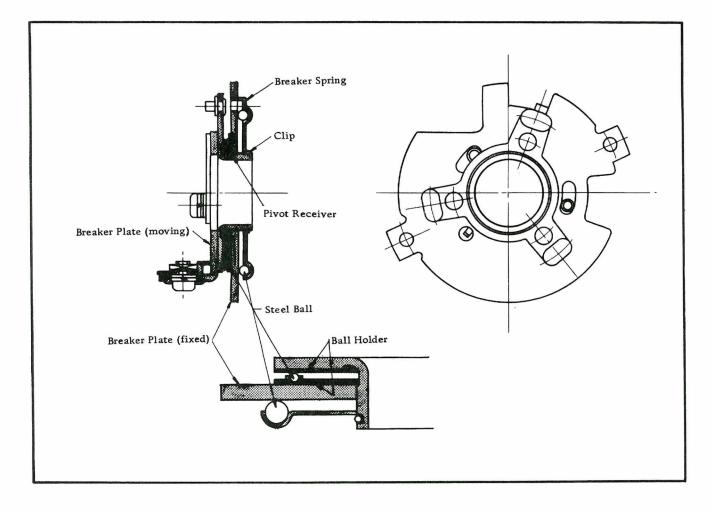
Breaker Plate Collecting Part Mechanism
